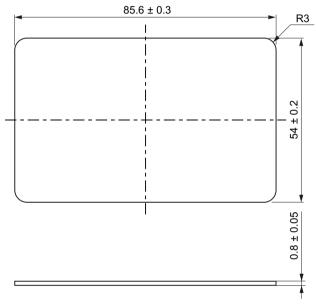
Dimensional drawing MDS D400 (dimensions in mm)
